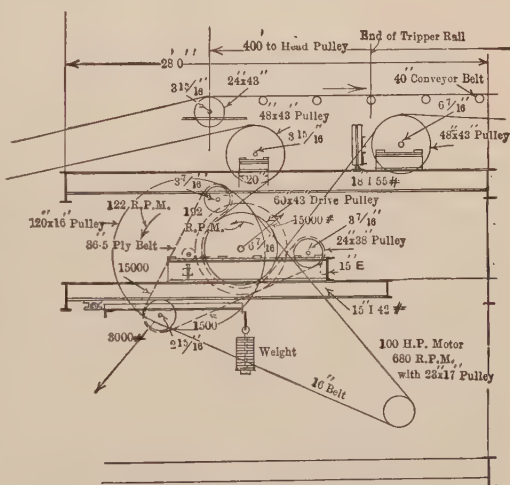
40-inch Conveyor Belt driven by Pressure Belt at Hump on Return Run.
